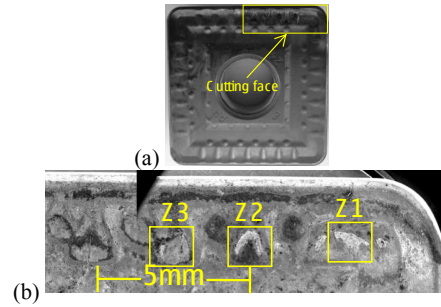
(a) SNMM250924RH insert after machining and (b) SEM micrograph of the engaged cutting face, highlighting several localized wear zones.
